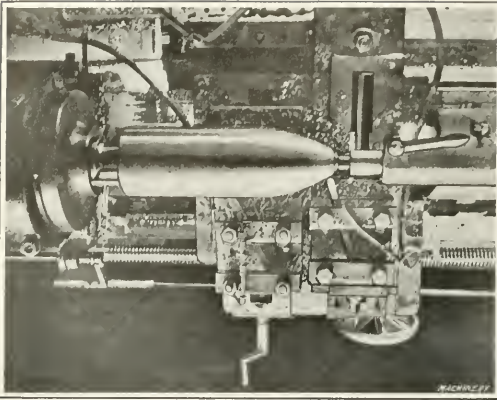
Close View of Tools used for performing Rough-turning Operation
